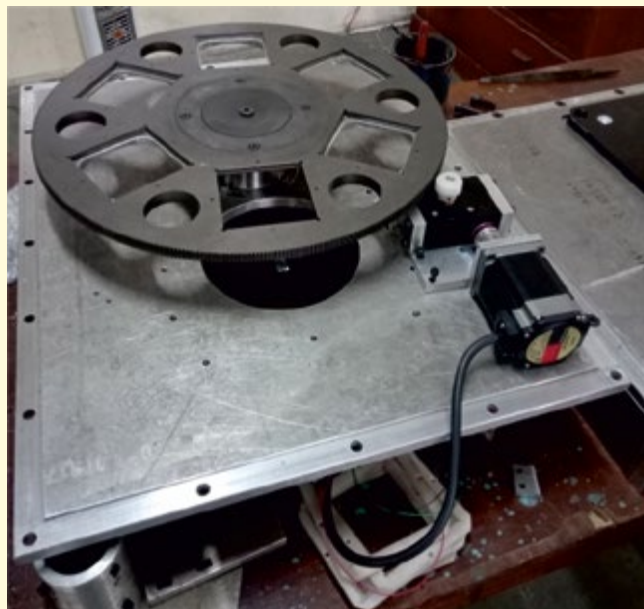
The complete design and developments of filter unit were carried in-house using CNC and conventional machines.
